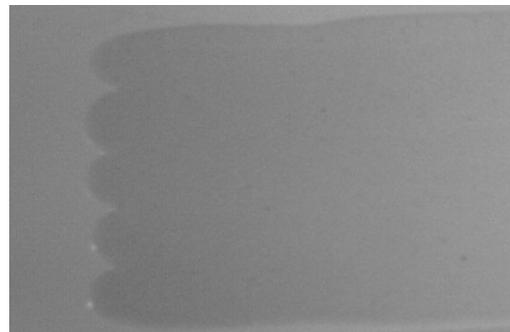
Layer casted by a slurry distributor equipped a guide plate having holes with hole distance of 13 mm
